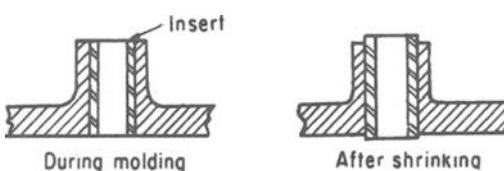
Molded materials with high shrinkage values during cooling will shrink below the metal inserts, allowing the insert ends to extend beyond the part.
